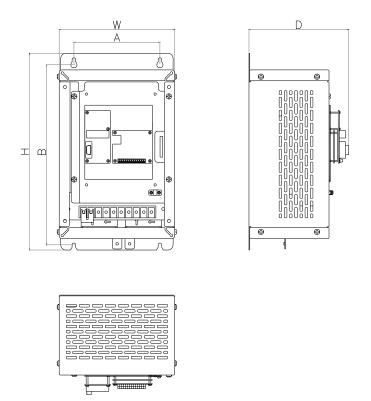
Schematics for Installation Dimensions of Integrated Escalator Drive Controller
